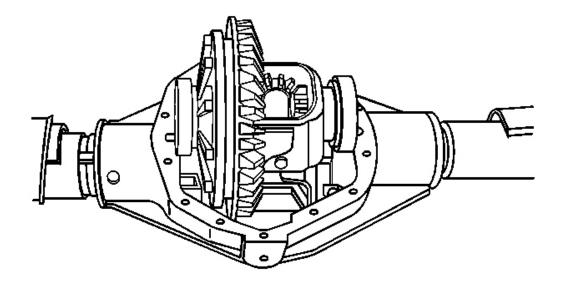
View Of Differential Case And Axle Housing Courtesy of GENERAL MOTORS CORP.
